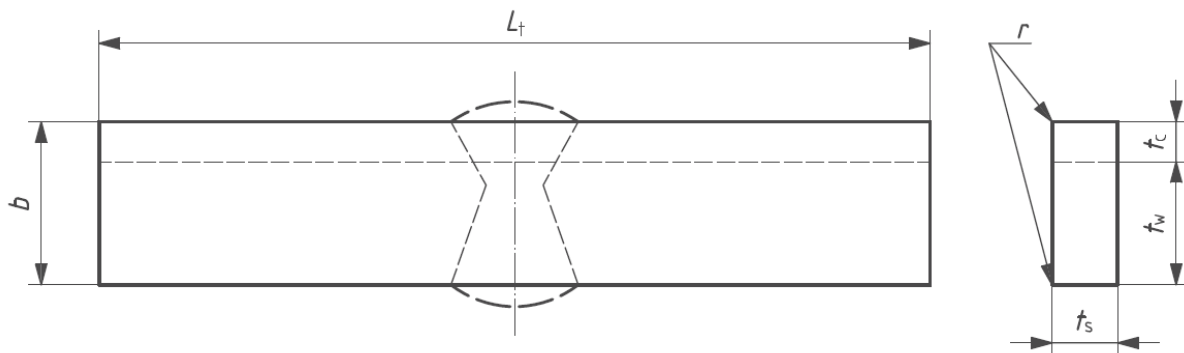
Side bend test specimen for cladding with a butt weld (SBCB).
